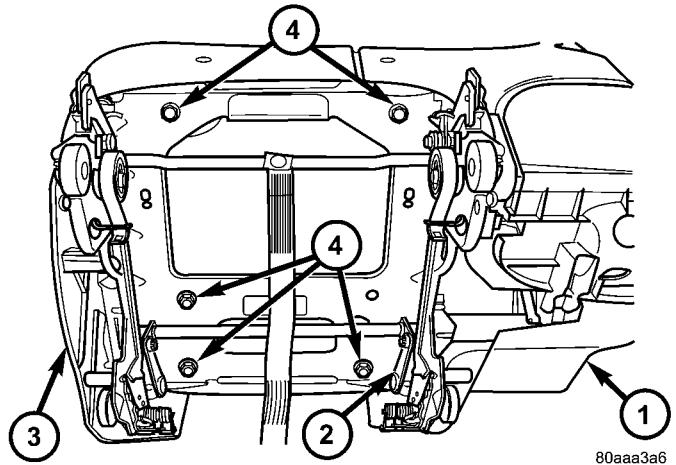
BUCKET SEAT RISER - QUAD BUCKET
